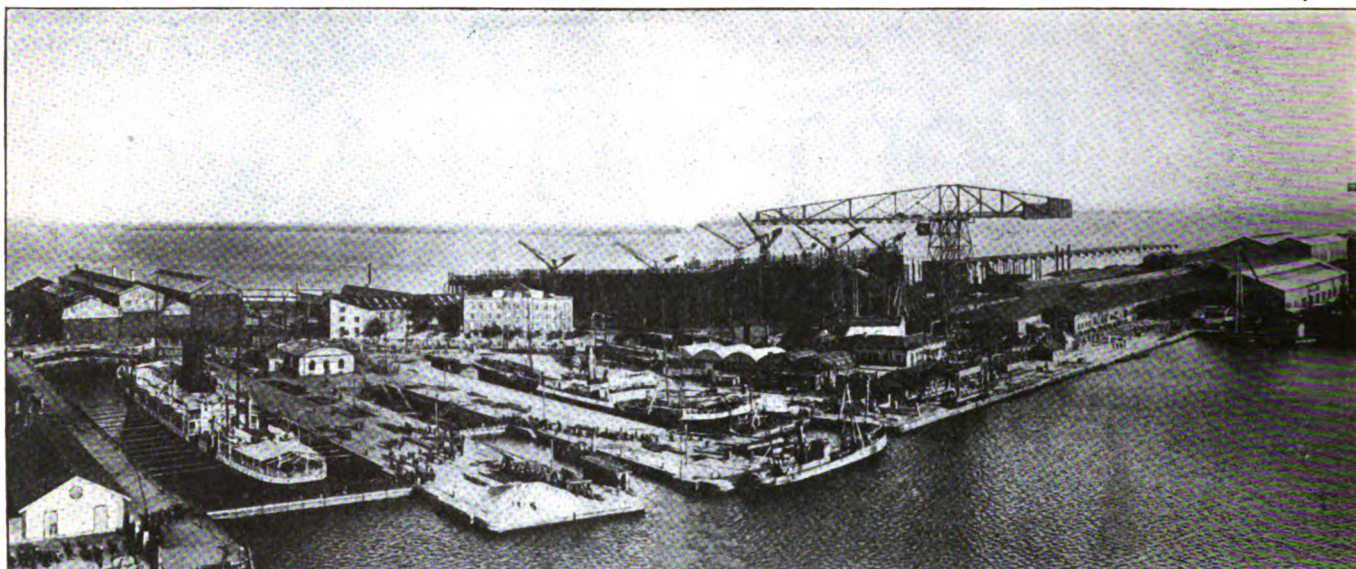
WELL EQUIPPED FRENCH SHIPBUILDING PLANT—THE PENHOET WORKS AT ST. NAZAIRE
